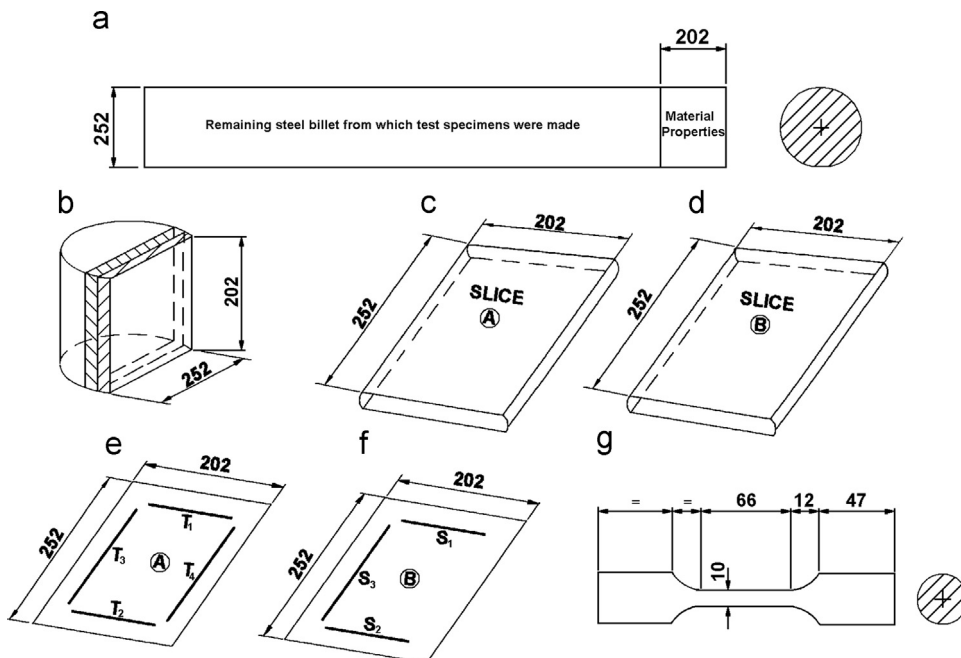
Cutting pattern for material data specimens. Also, dimensions of round tensile test specimens and the orientation of their cutting. All dimensions are given in mm.
